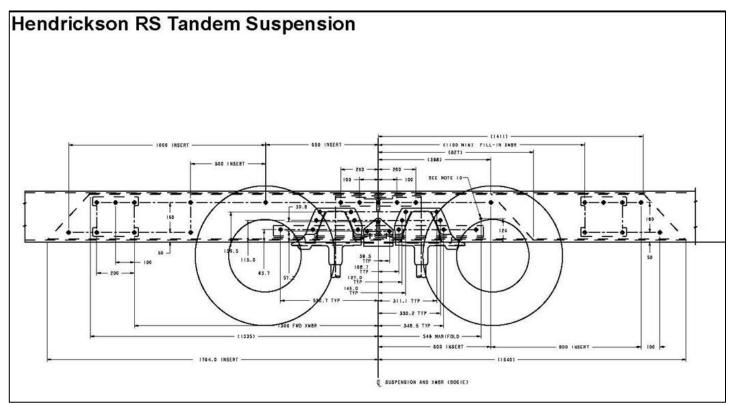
Hendrickson RS Tandem Frame Drilling (Dimensions In Millimeters)
